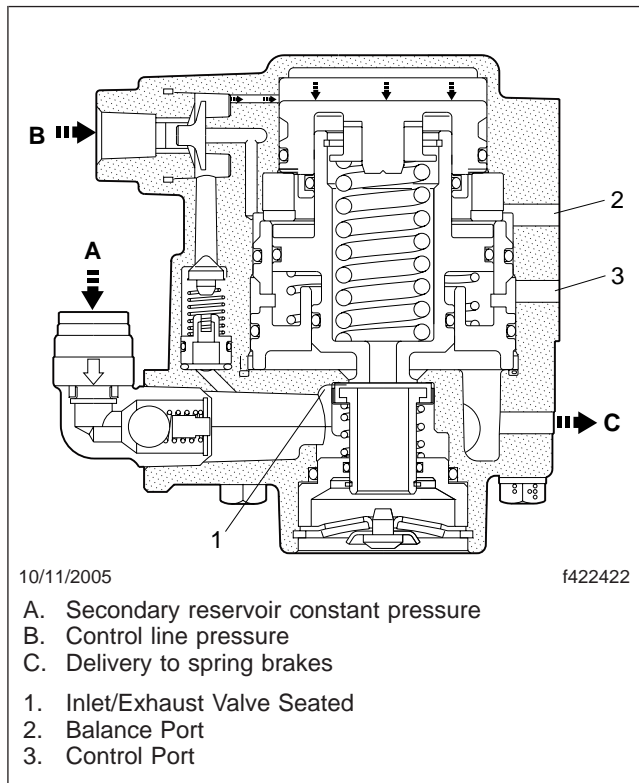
, Charging the Spring Brake Actuators Above 107 psi (737 kPa)
